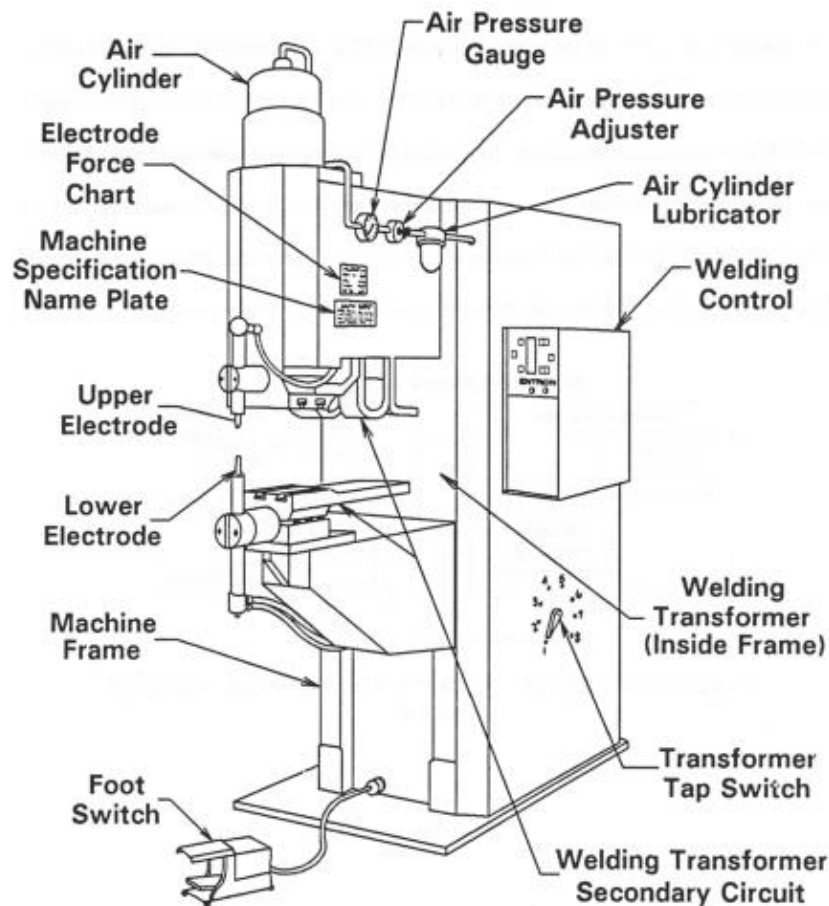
The Main Components of Resistance Spot Welding Machine [6]
